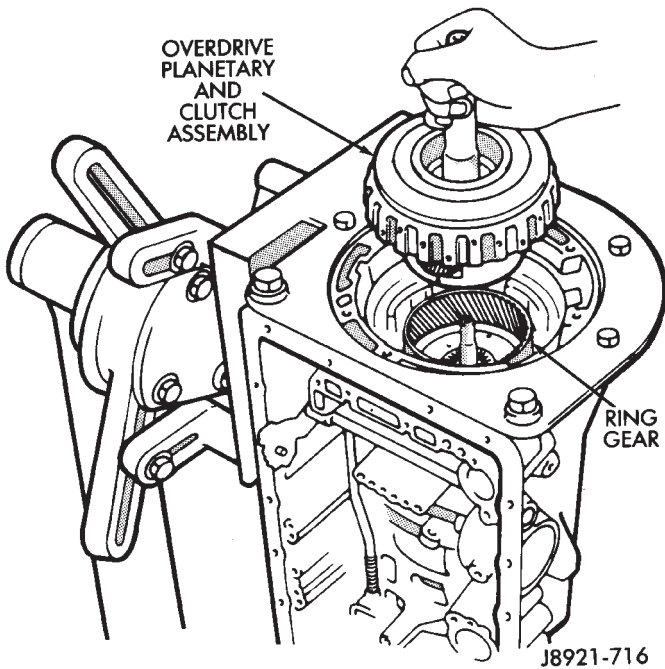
Installing Overdrive Planetary And Clutch Assembly
